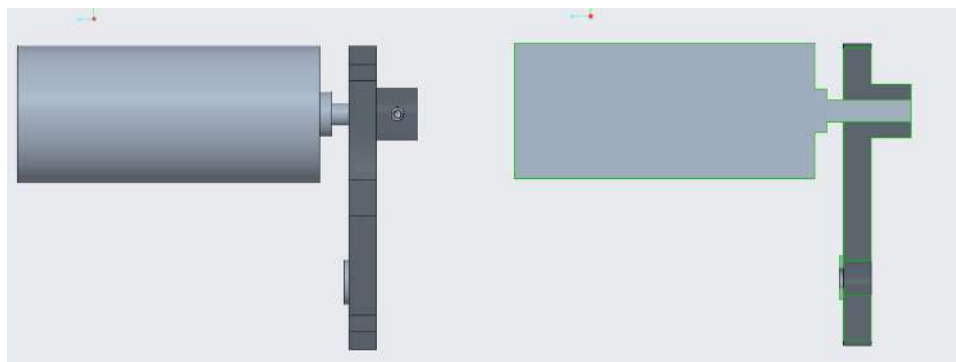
Diagram for how the DC motors will interface with the crank wheel. This system will utilize a pressure fit and set screws to ensure torque transmission.
